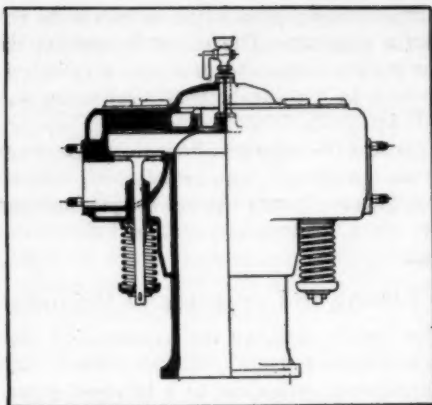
Part section of a cylinder, showing the method of guiding a valve and the scheme of water jacketing
